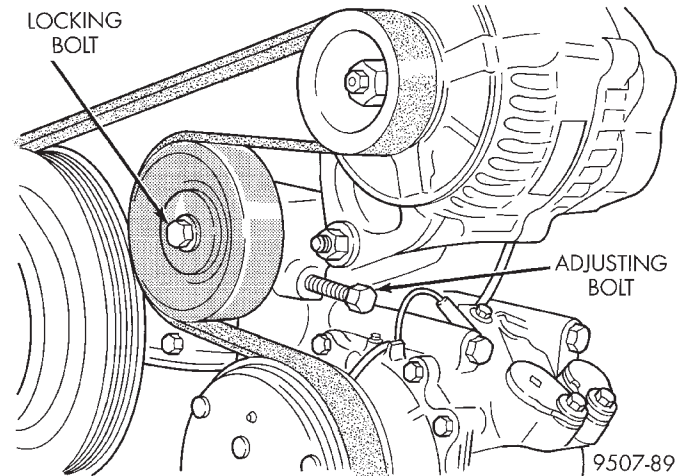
Air Conditioning Compressor and Generator Belt Idler
